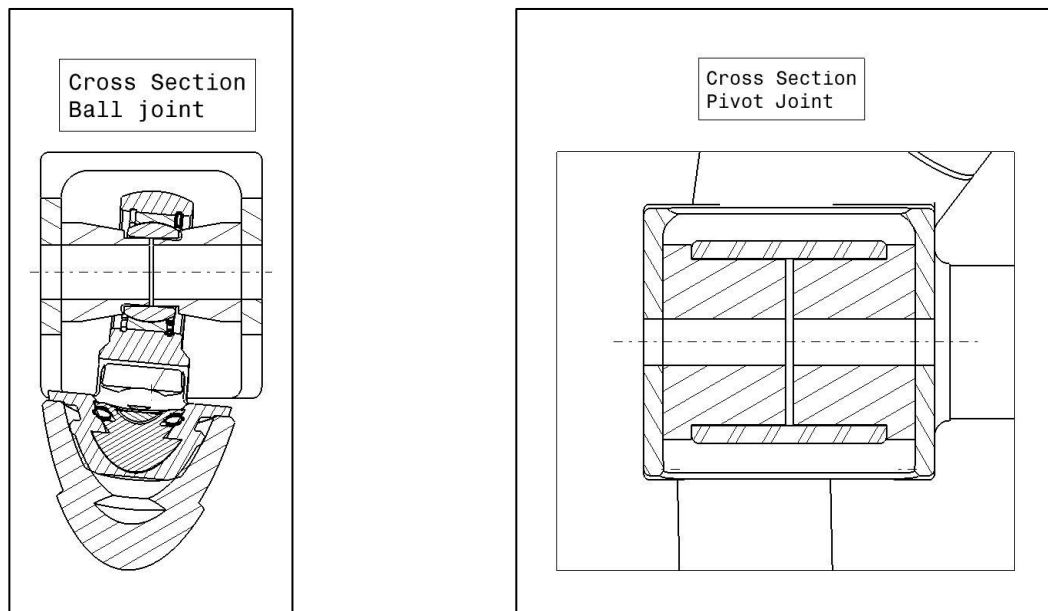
Left: Detail of the coupling of Top Mount and Damper; Right: Cross section of the Pivot Joint.
